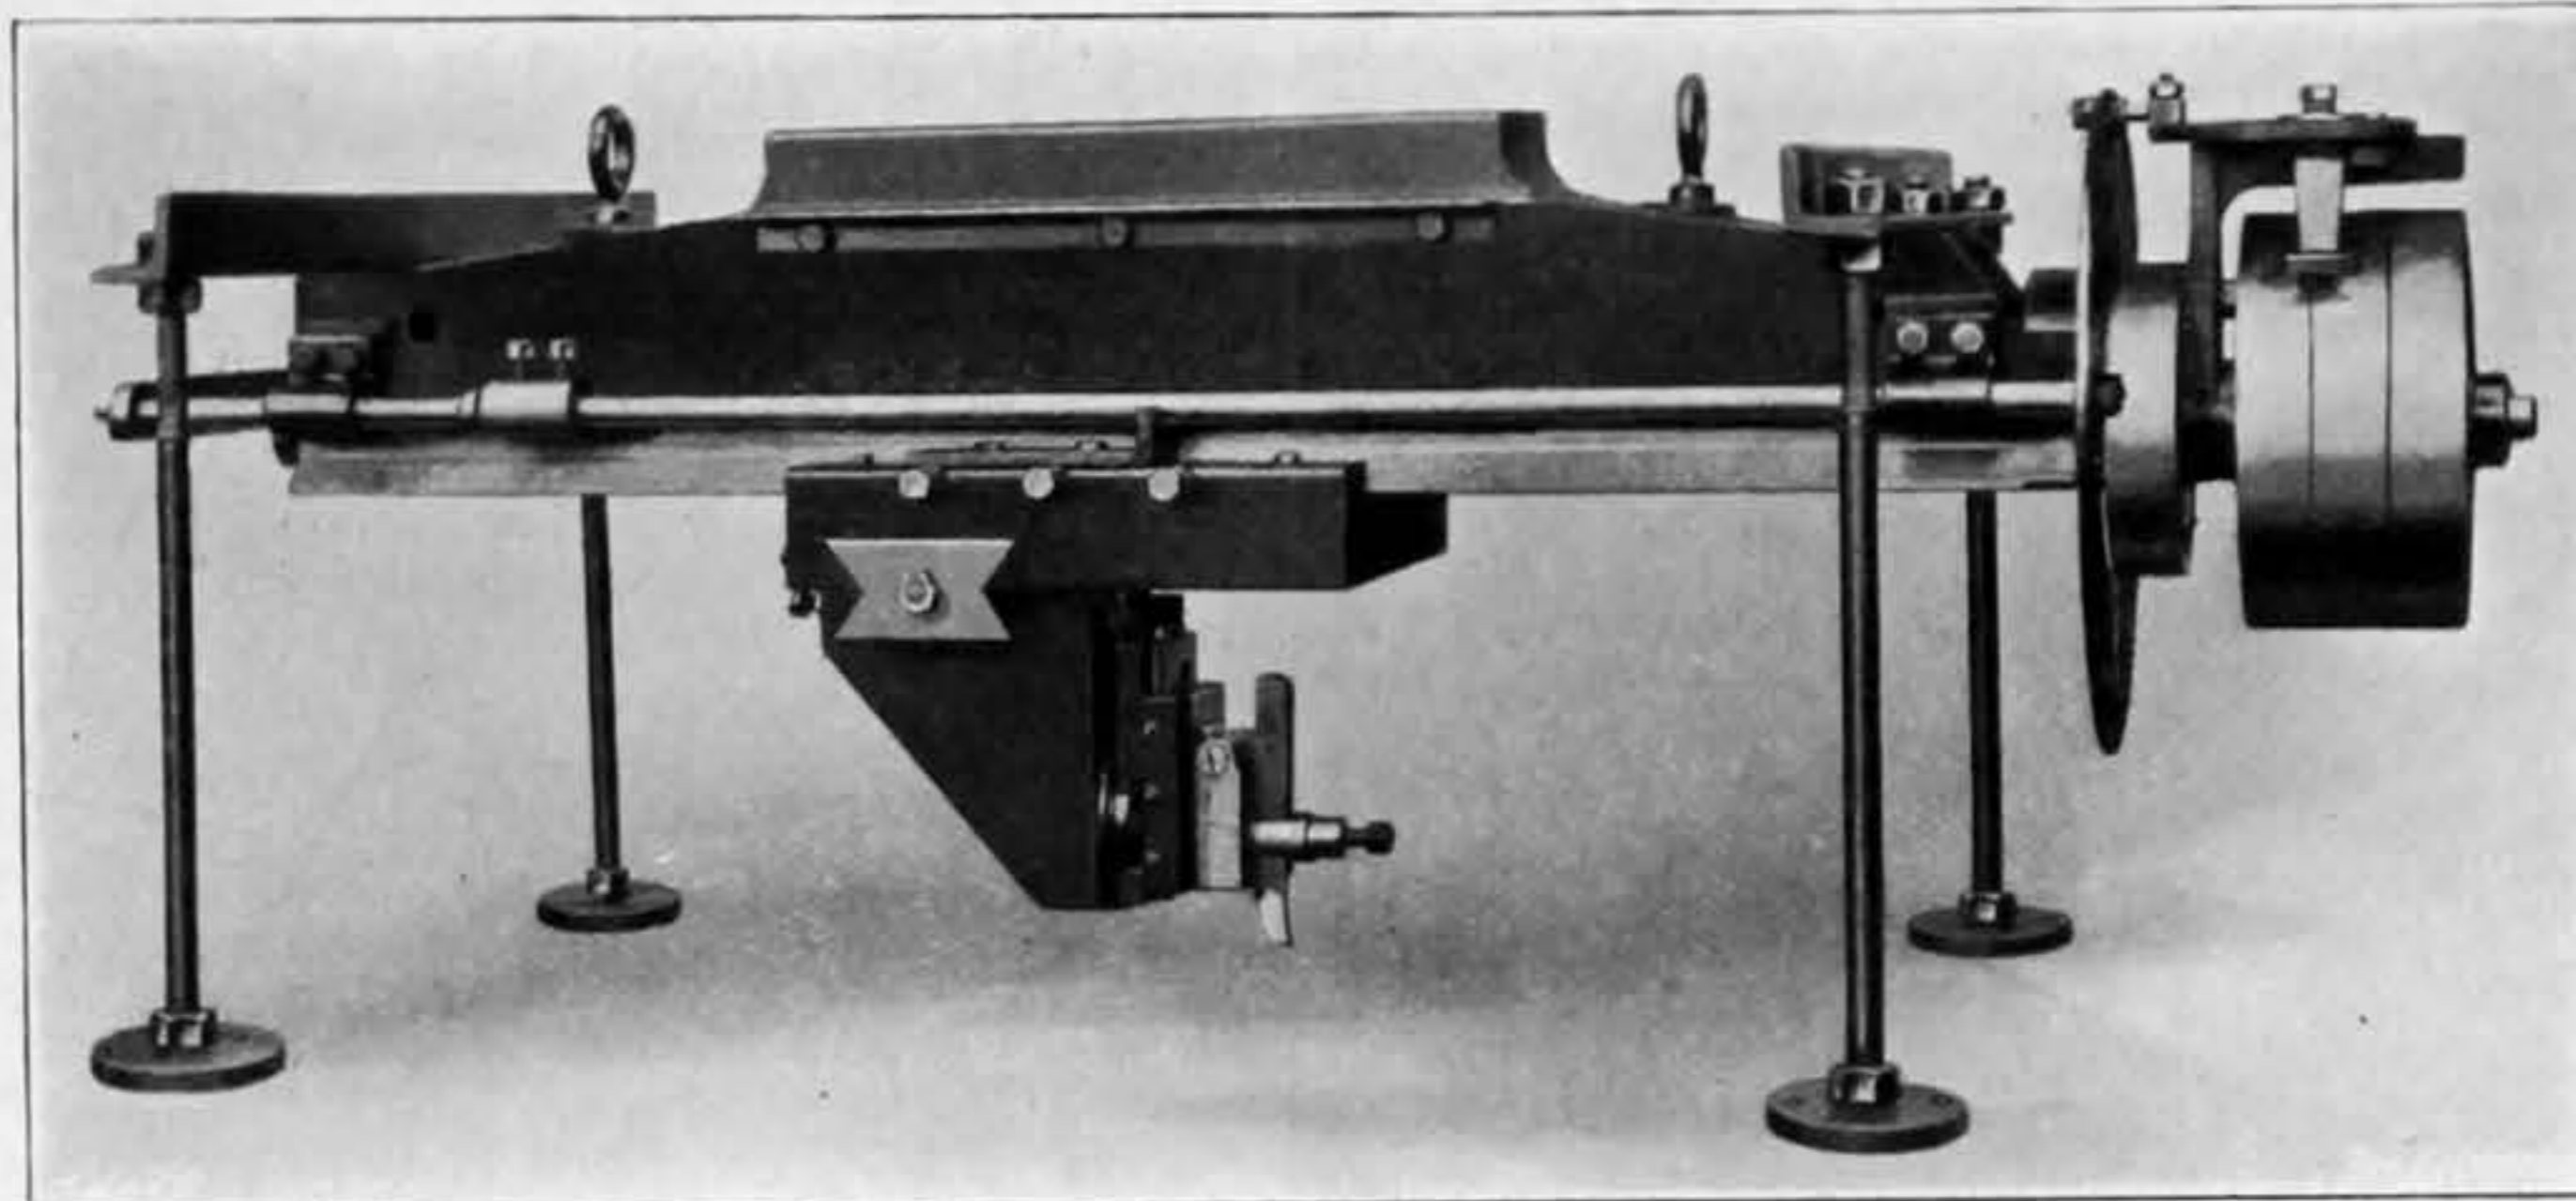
PORTABLE PLANING MACHINE—MASSEY
